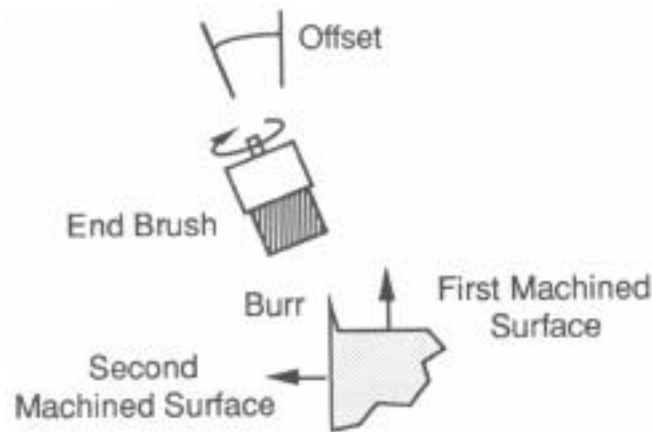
Tool Orientation. A burr occurs at the intersection of two machined surfaces, typically in the plane of the second. To effectively remove the burr, the orientation of the tool is offset from the normal of the first machined surface.
